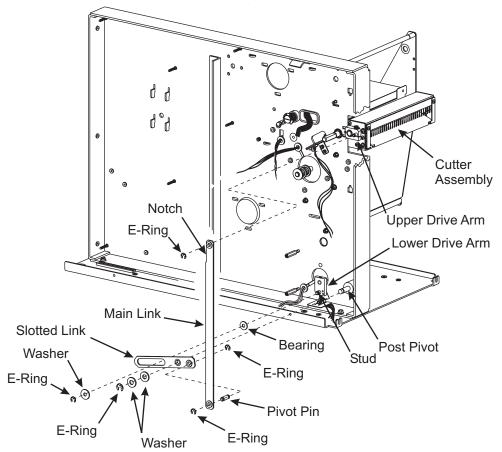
Remove and Install the Cutter Main and Slotted Link
